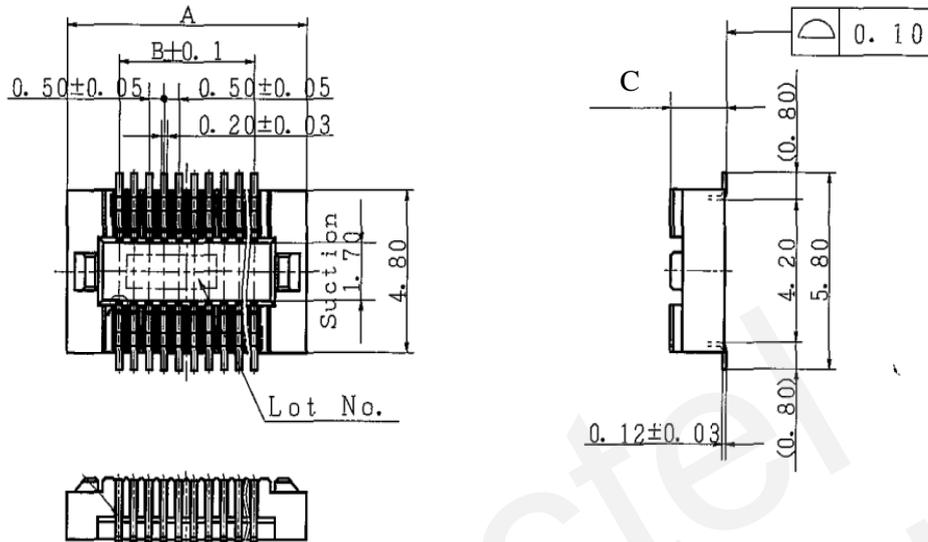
Sketch map of 100 pin board to board socket (Unit: mm)
